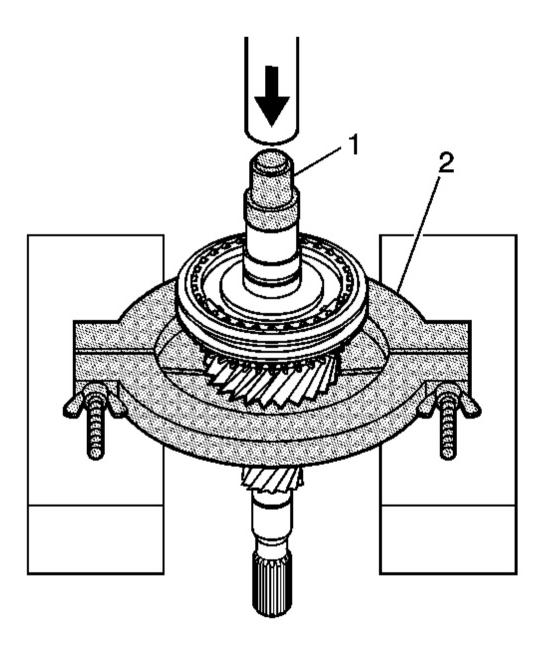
Removing Bearing Collar & 3rd/4th Synchronizer Courtesy of GENERAL MOTORS CORP.
